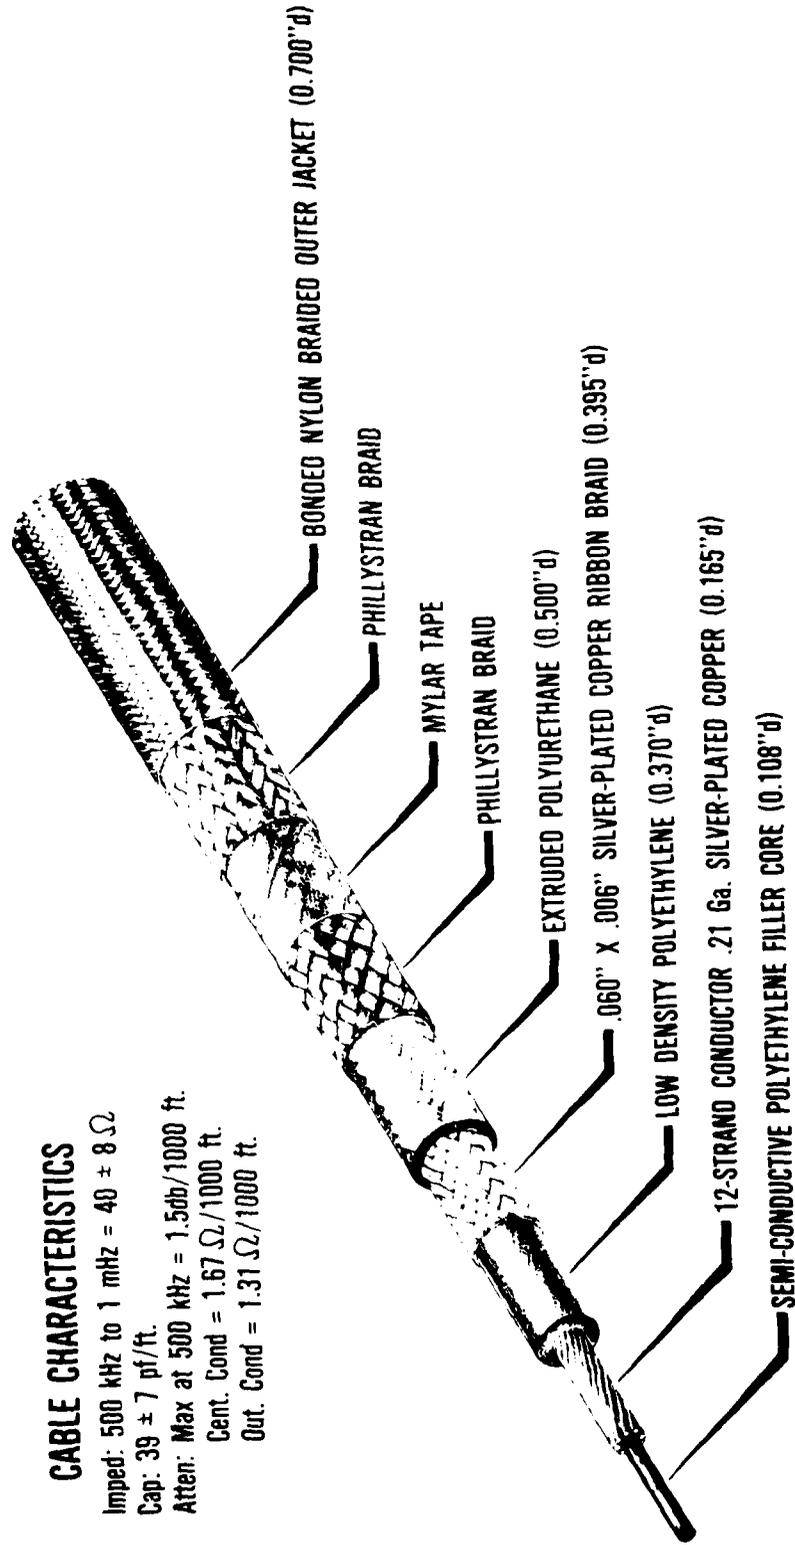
PROTOTYPE CABLE CONSTRUCTION DETAILS
